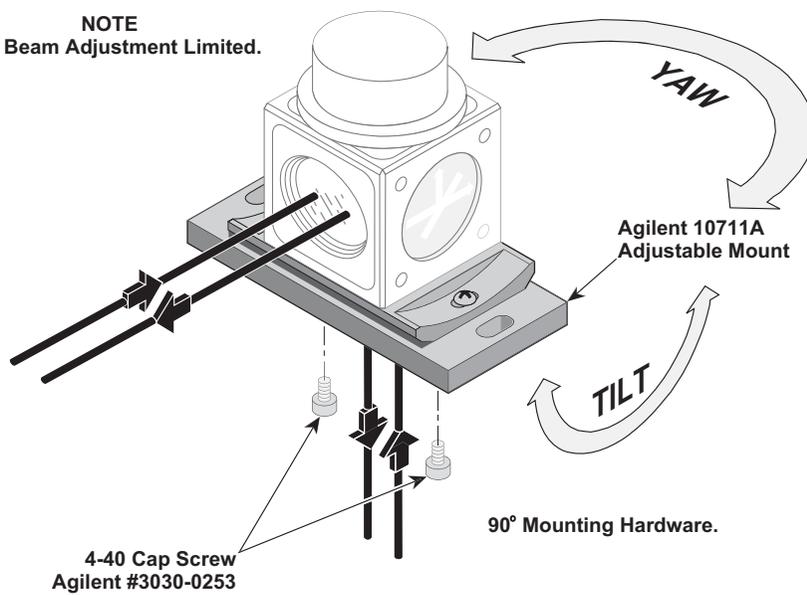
Vertical Plane Mounting Using the Agilent 10711A Adjustable Mount
